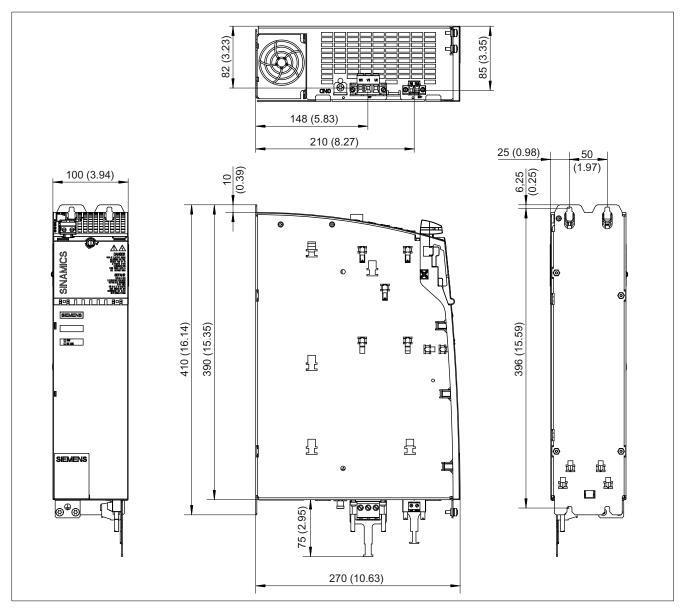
Dimension drawing of 20 kW Basic Line Module with internal air cooling, all dimensions in mm and (inches)
